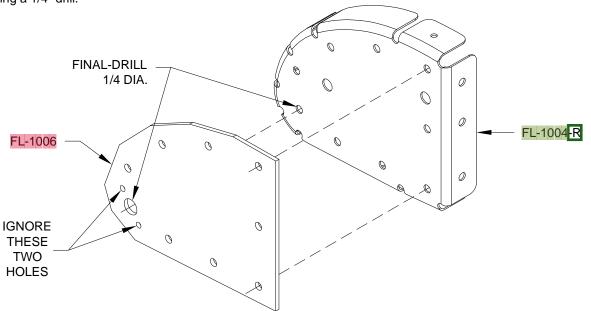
INBOARD ROD END RIB SUBASSEMBLY
